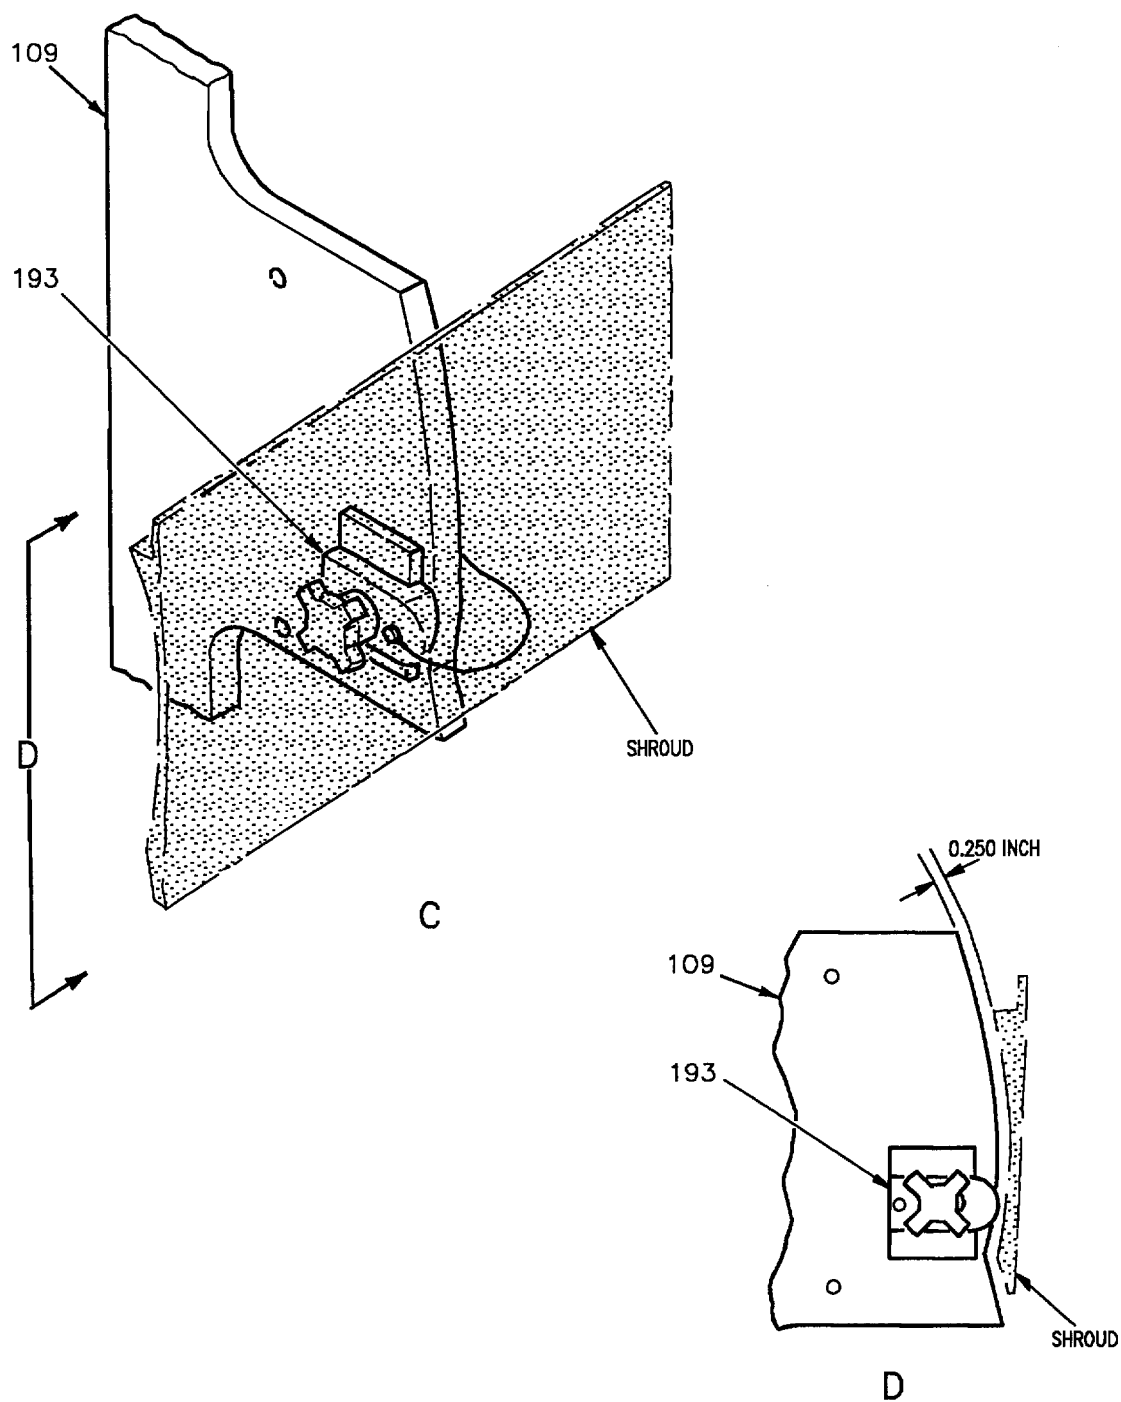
Moldline Contour and Inboard Trim Inspection (Sheet 3)
